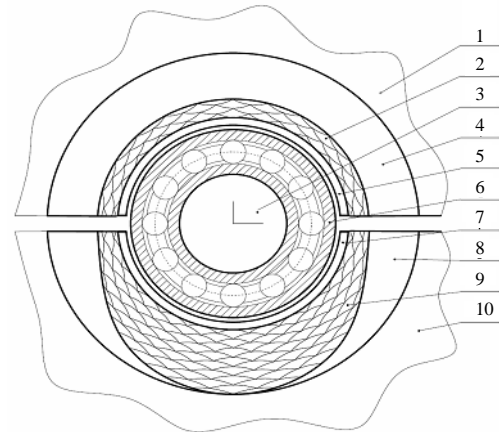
Elastic suspension with quasi-zero stiffness; 1: Upper part of machine case; 2: upper inset of metamaterial with quasi-zero stiffness; 3: shaft; 4: top liner; 5: inner top semiring; 6: bearing; 7: inner bottom semiring; 8: bottom liner; 9: bottom inset of metamaterial with quasi-zero stiffness and 10: the bottom part of machine case
